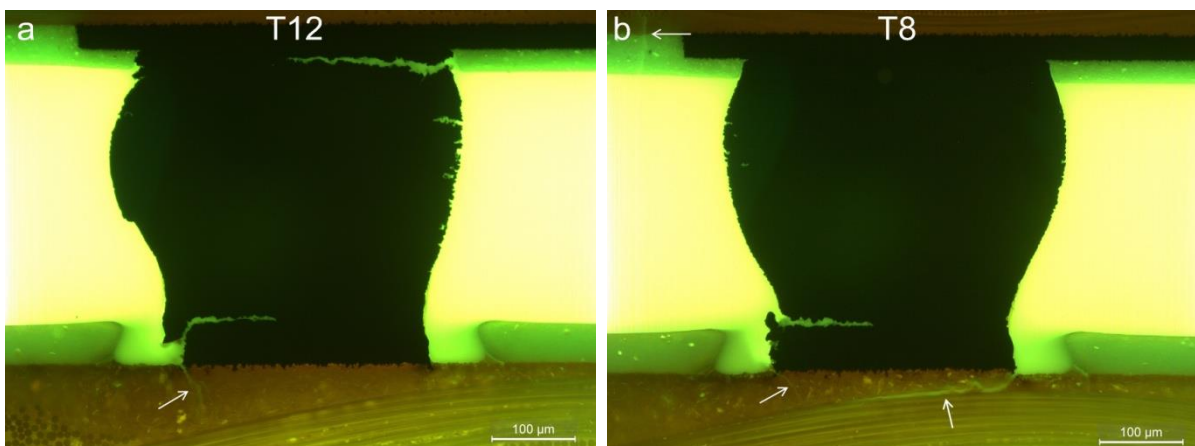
Cross-sections of solder joints a) T12 and b) T8 in the second row of solder joints to a BGA208 with the SN100C/SN100C combination that failed after 908 cycles showing cracks in the PCB and BGA laminates.
